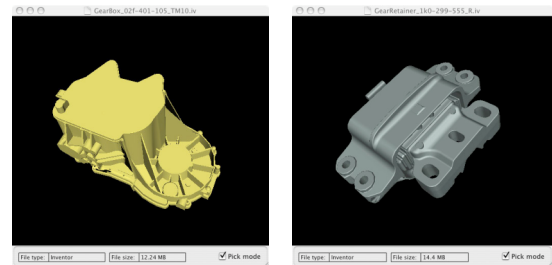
Gear box and gear box adaptor for a VW Phaeton in CAD system
